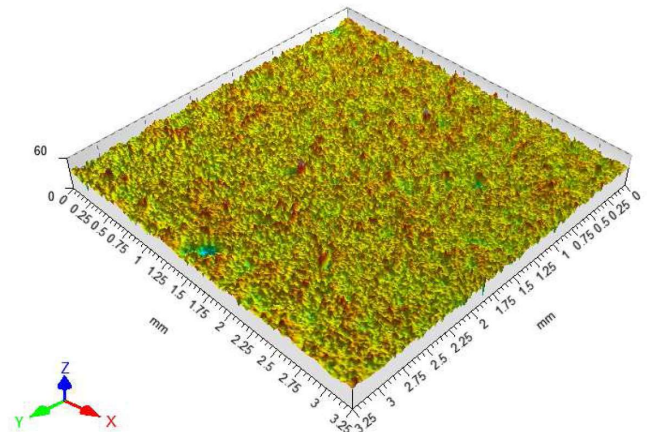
An example of surface morphology of the flexible adherend after sand blasting process
